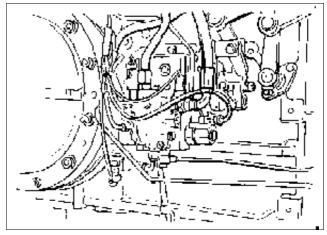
On machines equipped with electrohydraulic control functions, disconnect the leads from the solenoid valves operating the P.T.O. clutch, the four wheel drive coupler and the front and rear differential lock actuators.
